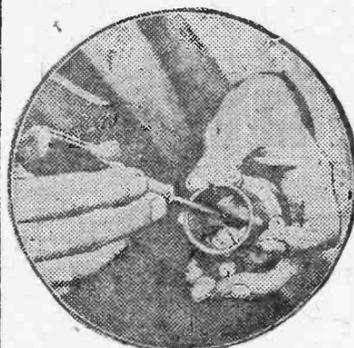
To assure good contact springs of the tube socket and tube prongs, bend up the springs as shown above.
